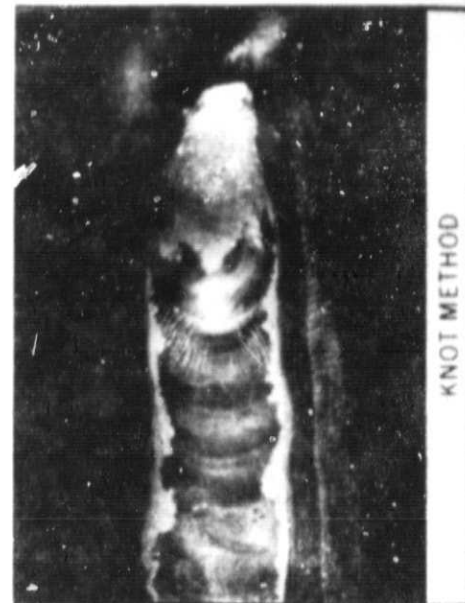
Weld termination in 0.250 in. Inconel 718.
